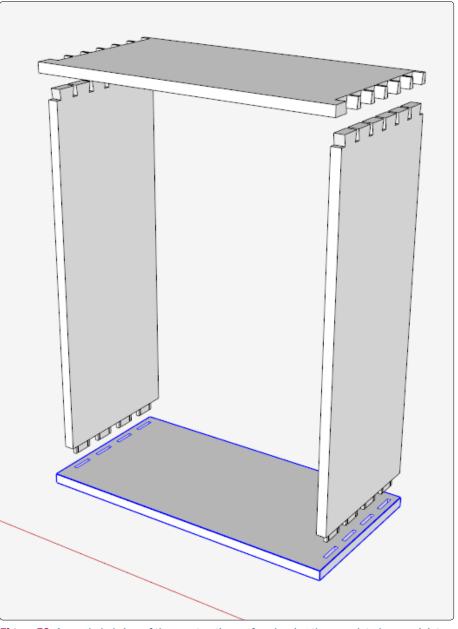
An exploded view of the construction so far, showing the completed corner joints.
